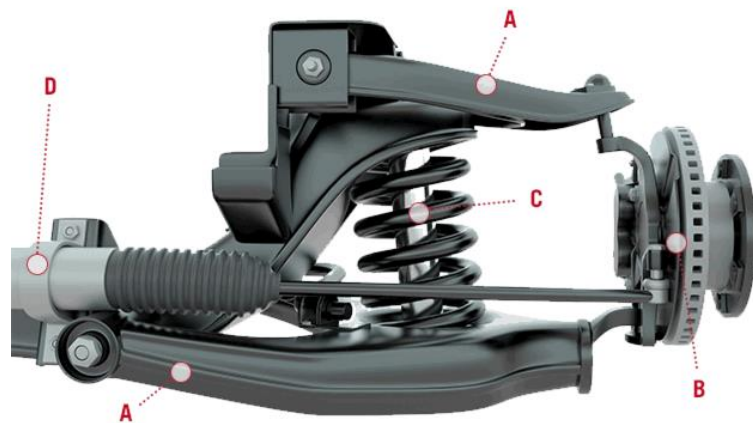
Automotive suspension system. A) Control arms. B) Wheel spindle. C) Spring-damper assembly. D) Rack and pinion assembly [16].
